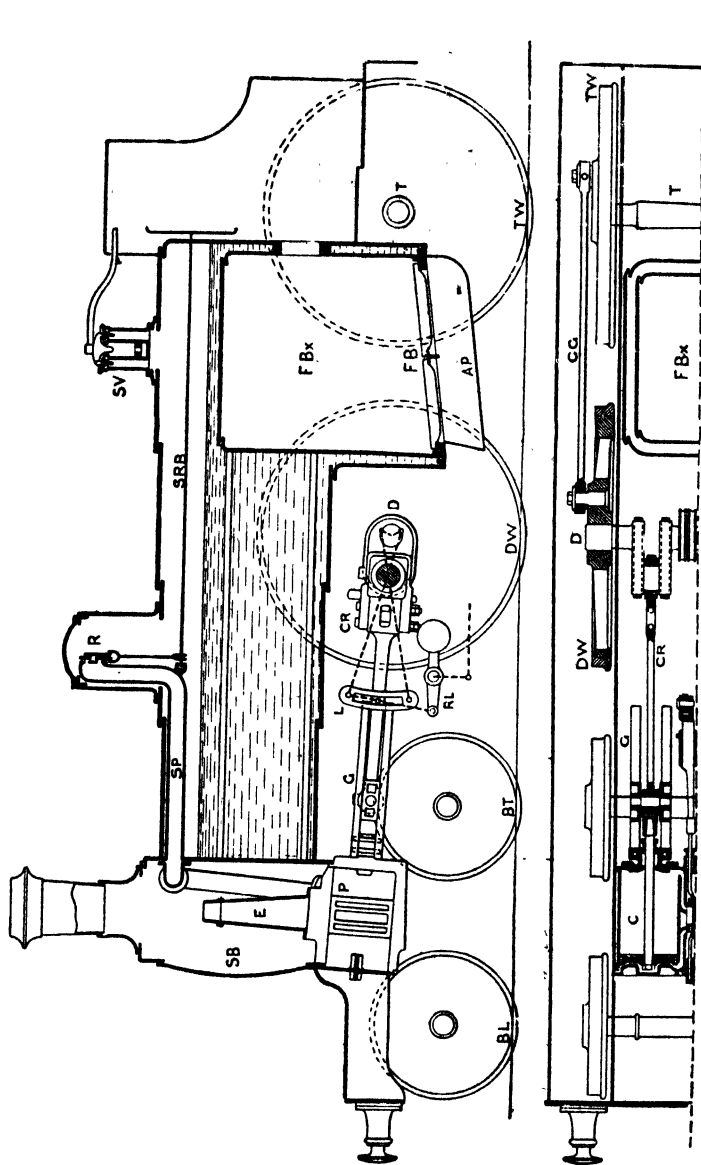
FBx, fire bars; SB, smoke box; SV, safety valve; R, steam regulator valve; SRR, steam regulator valve bar; SP, steam-pipe; E, exhaust pipe; P, steam-ports; G, guides; L, link motion; RL, reversing lever; CR, connecting rod; C, cylinder; D, driving axle; T, trailing axle; DW, driving wheel; TW, trailing wheel; BL, bogie leading wheel; BT, bogie trailing wheel; CG, coupling rod.
